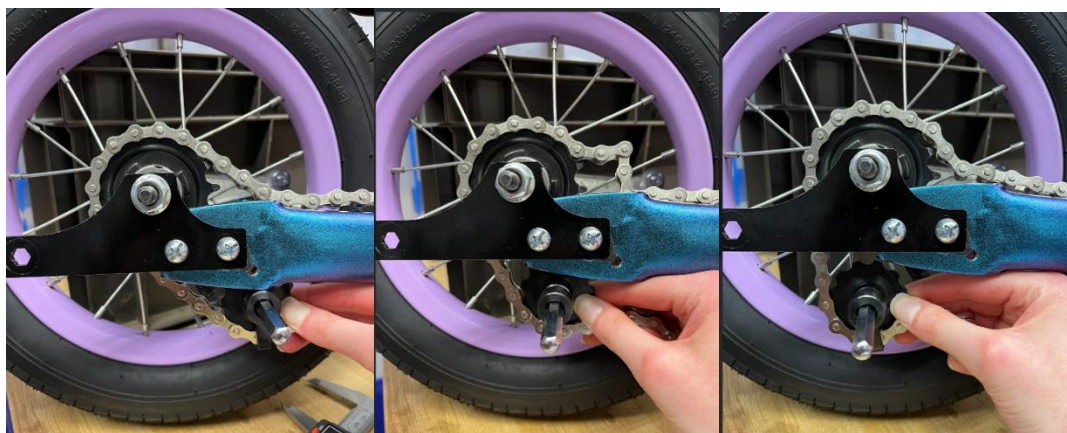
Possible Locations of Offset Gear to Increase Chain/Gear Contact
